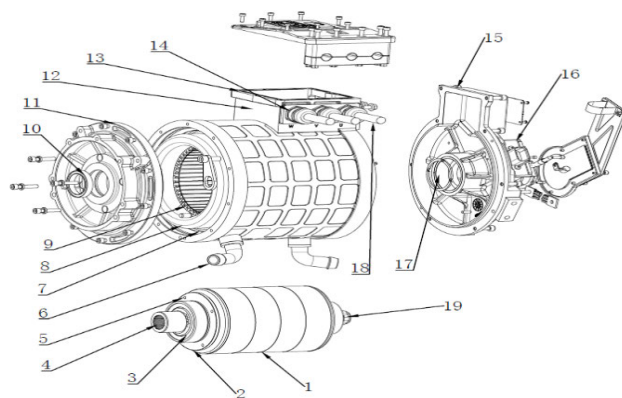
The structure of the drive motor in pure electric vans. 1 - rotor, 2 - rotor end cover, 3 - bearing, 4 - spline, 5 - fastening screw of rotor balance end cap, 6 - inlet of cooling water, 7 - jacket of cooling water, 8 - stator winding, 9 - core of stator, 10 - sealing rings of bearing, 11 - end cap fastening screw, 12 - junction box, 13 - seal ring, 14 - cable fixed head, 15 - fastening screw of rear end cap, 16 - position sensor, 17 - grease seal, 18 - three-phase lines, 19 - position sensor.
